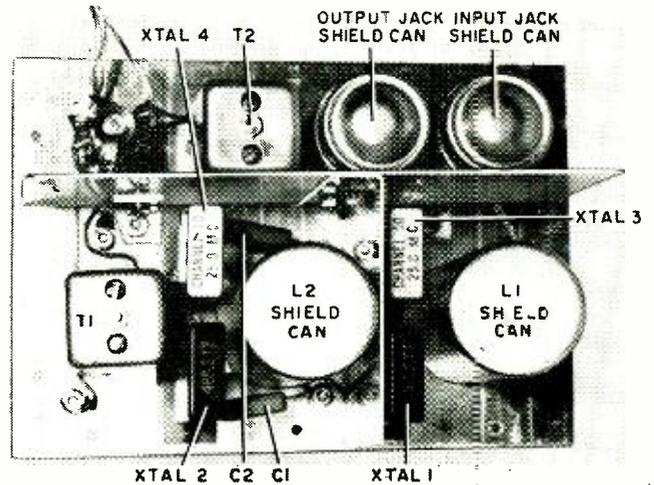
Inside view showing parts placement and the internal shields. Coil and jack shield cans are in place in this view.
